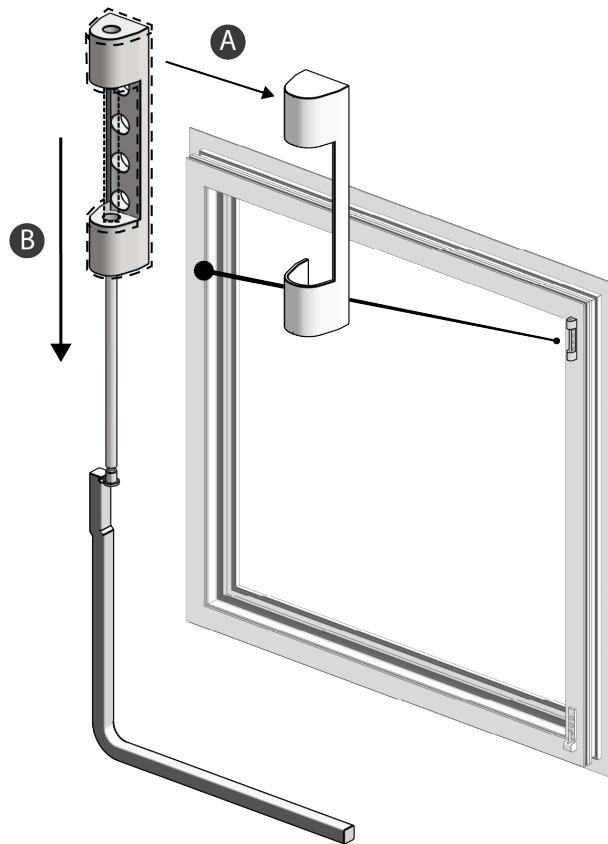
Remove the cover(A) and push the hinge pin down (B)
